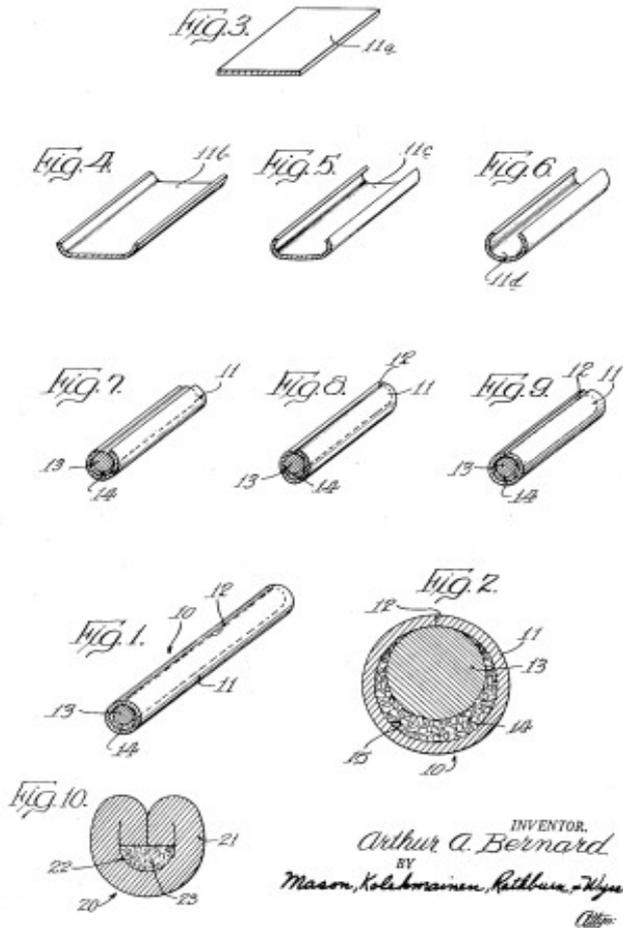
A. Muller: patent no. 2504868 "Electric arc welding": 18.04.1950 [6]
